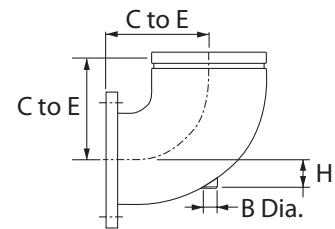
Reducing Base Support Elbow Figure 315 Groove x Male Thread 90° Elbow Figure 320 Groove x Groove x Male Thread Tee
